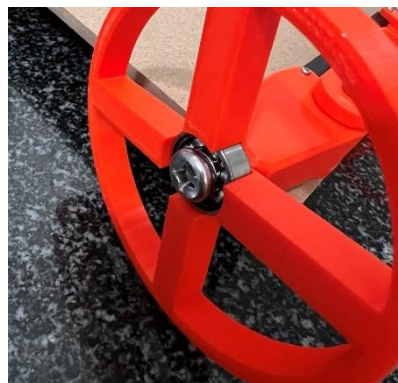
Front Wheel with Ball Bearing Fitted to Wheel Hub
